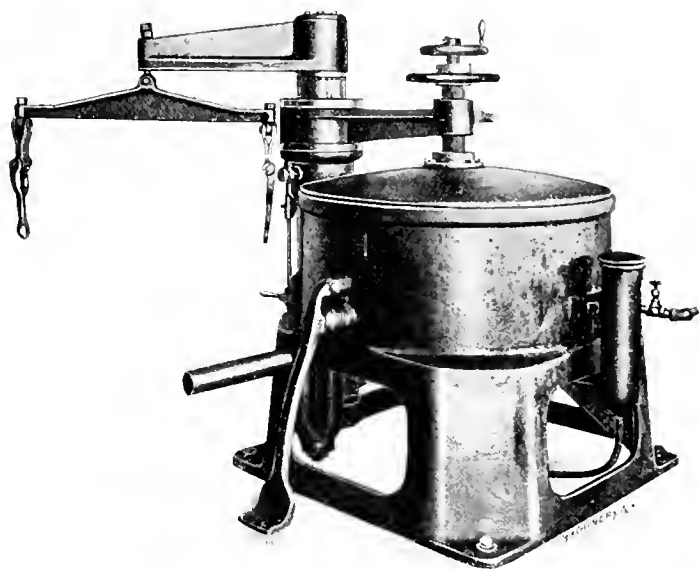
Centrifugal Oil Extractor for Chips, driven by a Steam Turbine, and using the Exhaust for Freeing the Oil.
